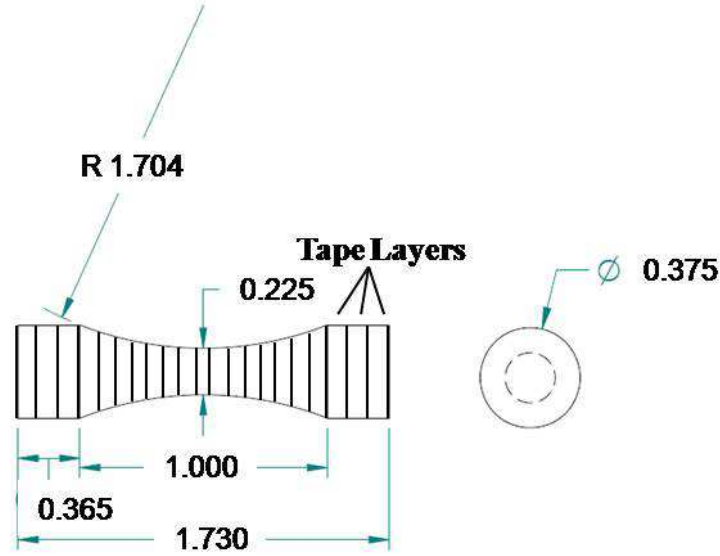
Geometry and tape diagram of fatigue specimens.
